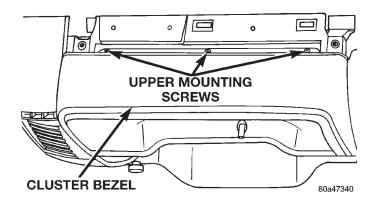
Cluster Bezel Upper Screws Remove/Install instrument panel. Tighten the screws to 2.2 N·m (20 in. lbs.).
